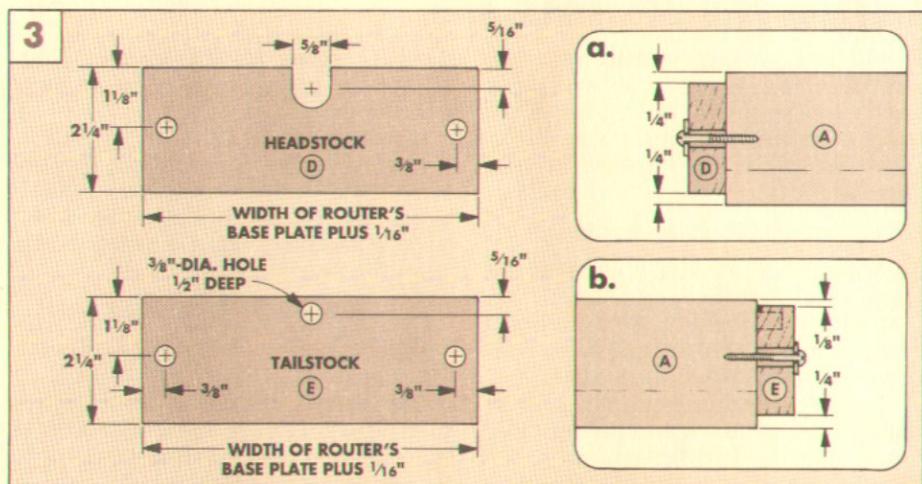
and 3. This piece has a short slot for the workpiece (a dowel) to rest in.
